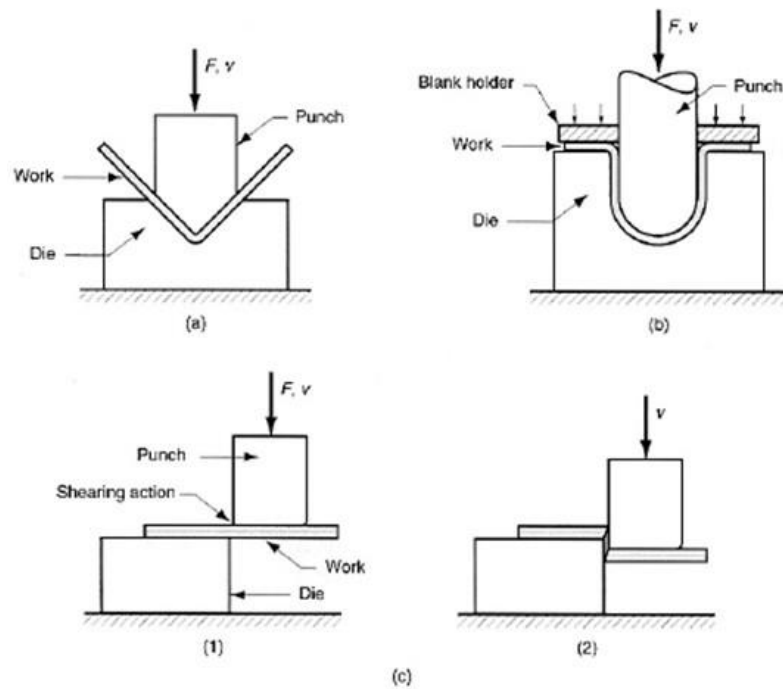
Sheet metal working (a) Bending; (b) Drawing; (c) Shearing; (1) as punch first contact sheet and (2) after cutting (Kenzie, 2015).
